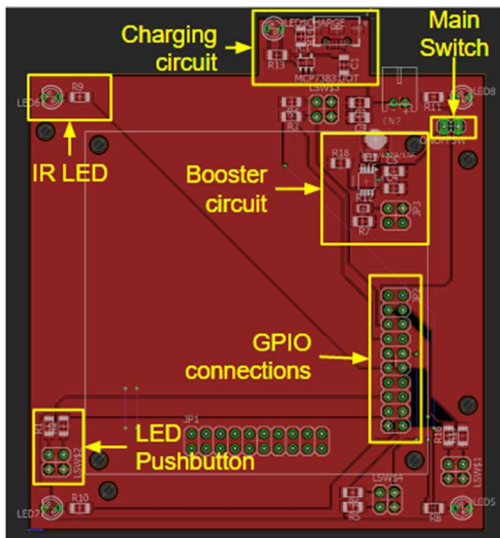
CAD Layout of the custom-built PCB. The board was built using the services provided by OSH Park and soldered using SDP soldering equipment.
